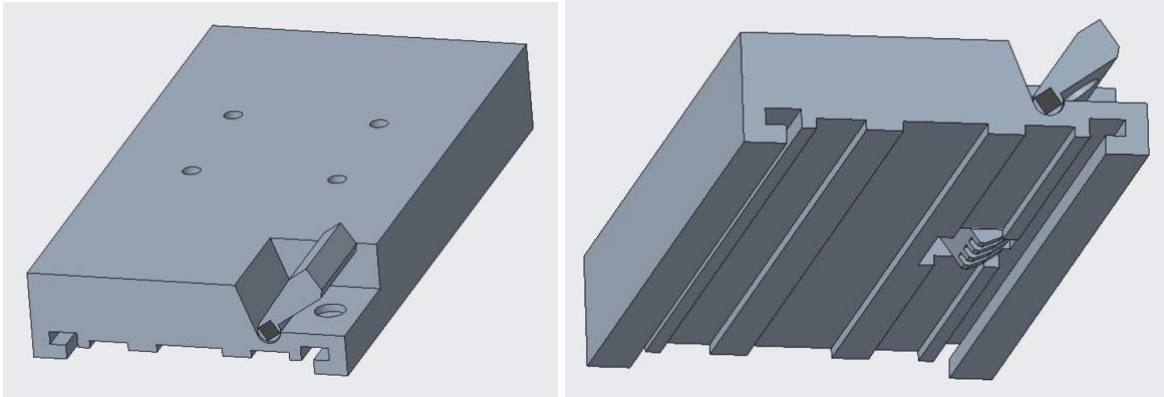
Top and Bottom View of Tech Toe Plate System Assembly
